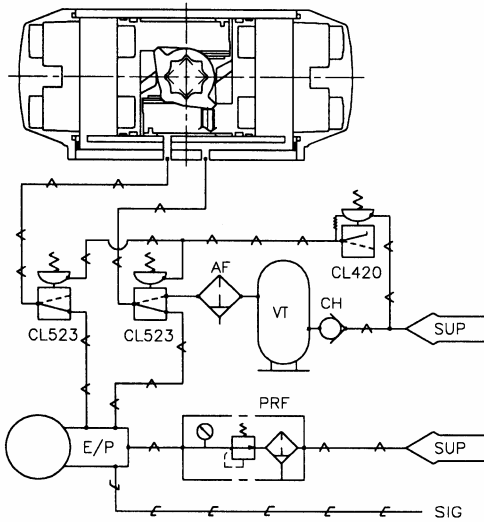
MODULATION BY POSITIONER: AIR FAILURE.....CLOCKWISE DRIVE SHAFT ROTATION
